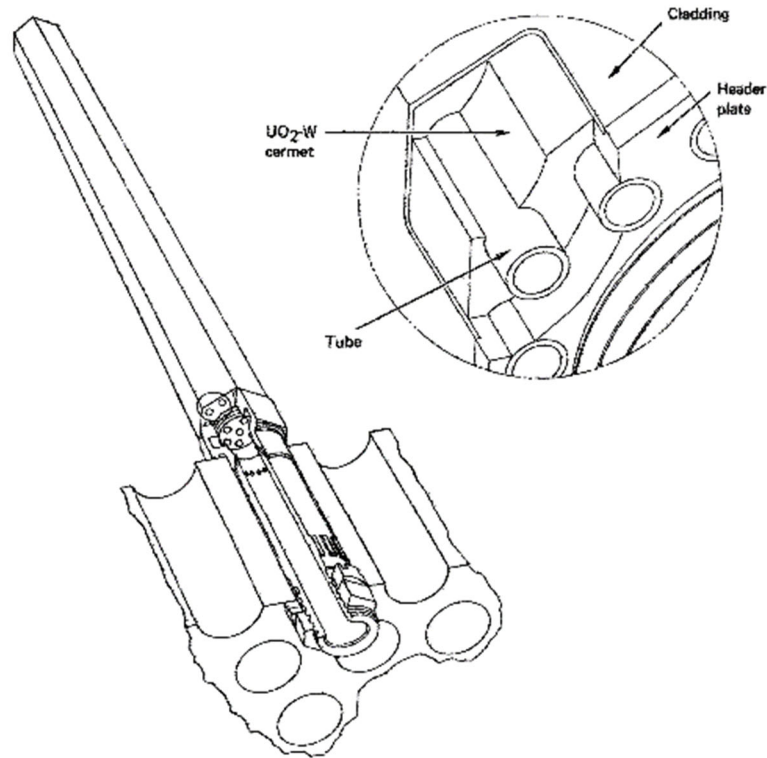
Sketch of GE 710 fuel element integrated into an assembly (Nuclear Energy Division, 1968a)
